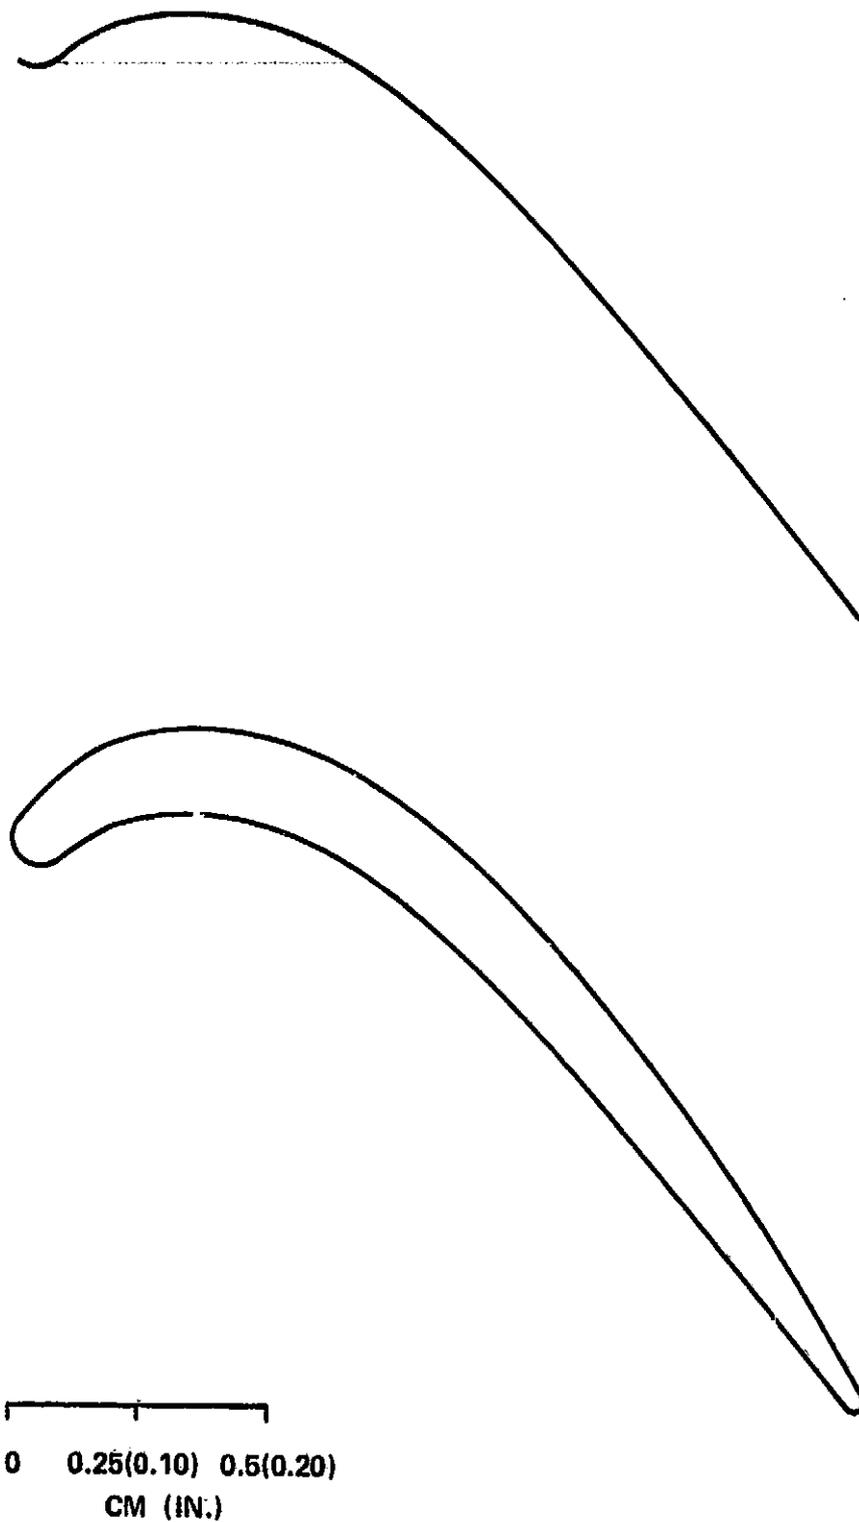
Rotor Tip Section [$R = 14.16$ cm (5.57 inches)] of the MATE Final Design
